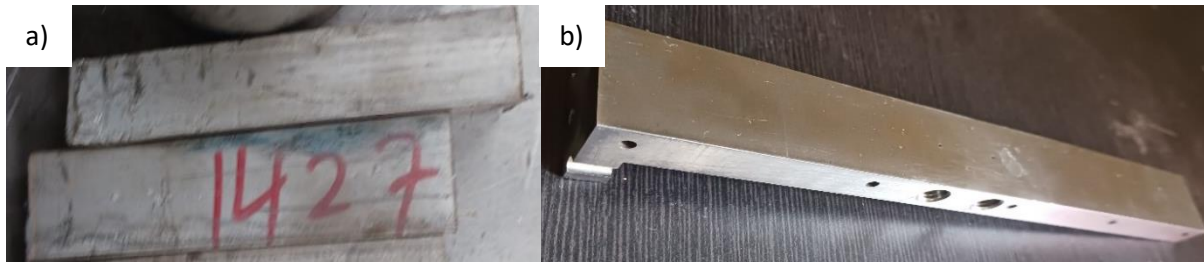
a) SS304 blocks b) SS Base plate of combustor after fabrication
